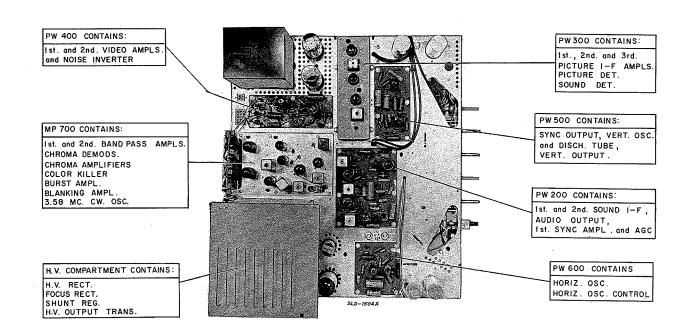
Top View CTC5N Chassis Showing Circuit and Printed Circuit Board Locations.
